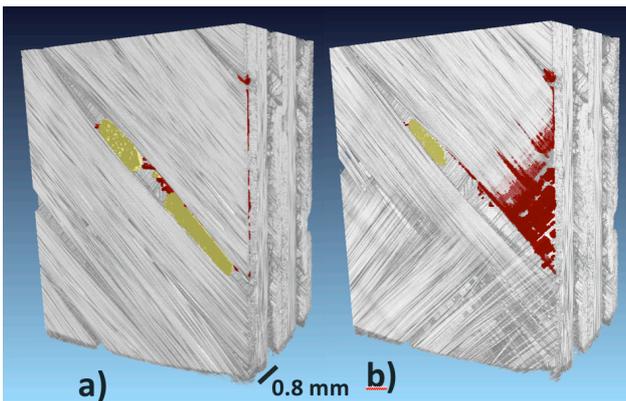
a) 3D reconstructed view taken 0.2mm from the front face of the specimen. b) 3D reconstructed view taken 0.6mm from the front face of the specimen.
